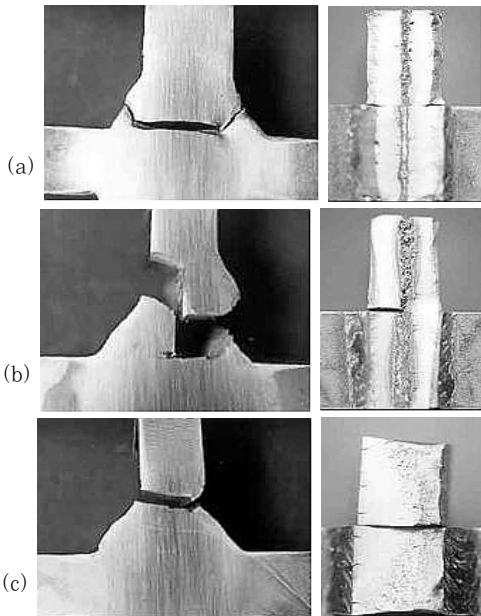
Typical three failure modes of cruciform joints (a) Typical root failure mode (Front failure section) (b) Typical mixed failure mode (Front failure section) (c) Typical toe failure mode (Front failure section)
